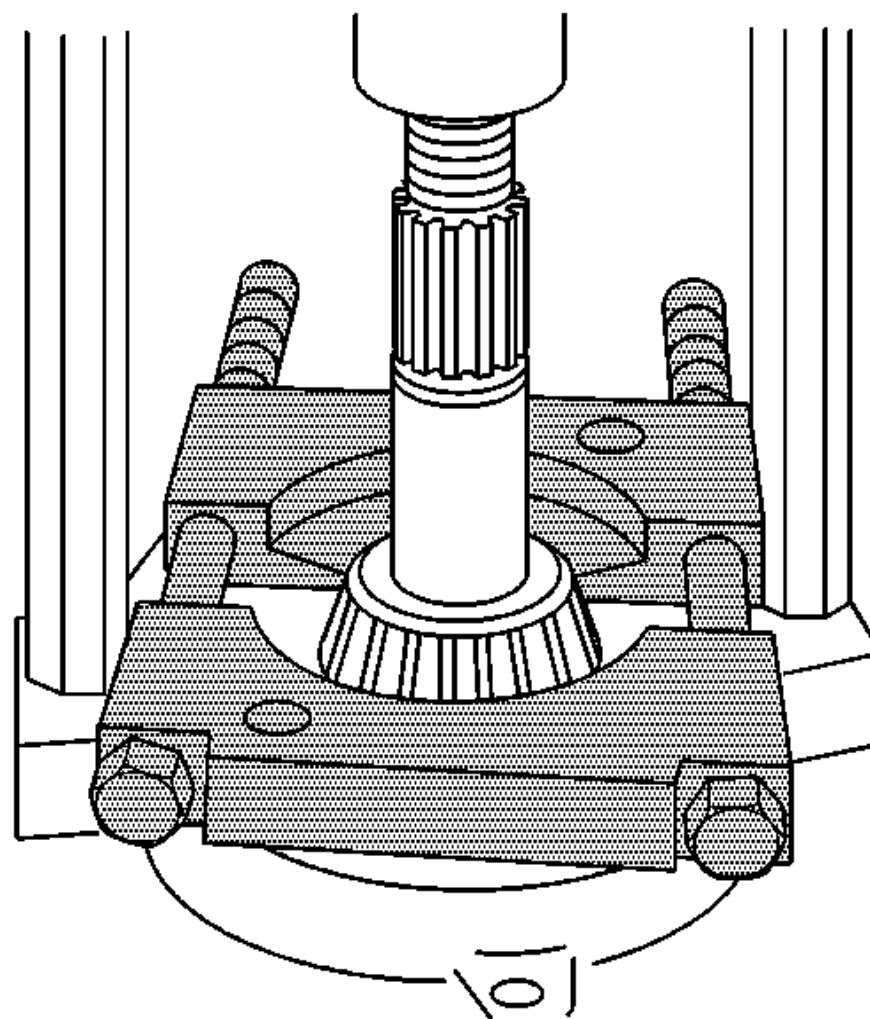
View Of Inner Pinion Bearing & Hydraulic Press
